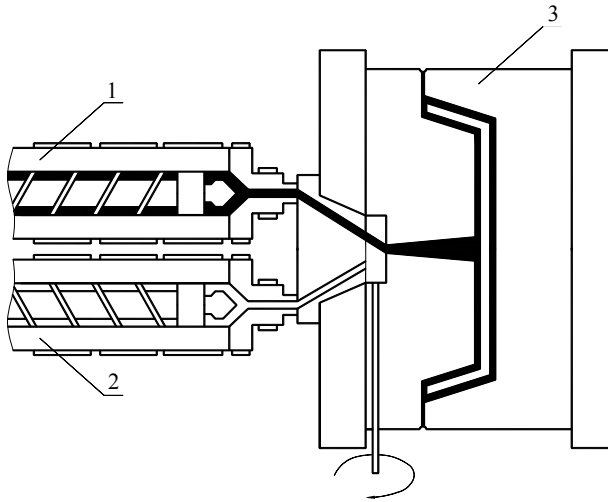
Equipment for multicompartment injection molding: 1 – extruder for formation of a surface layer; 2 – extruder for forming the core of the product; 3 – mold [own study]
